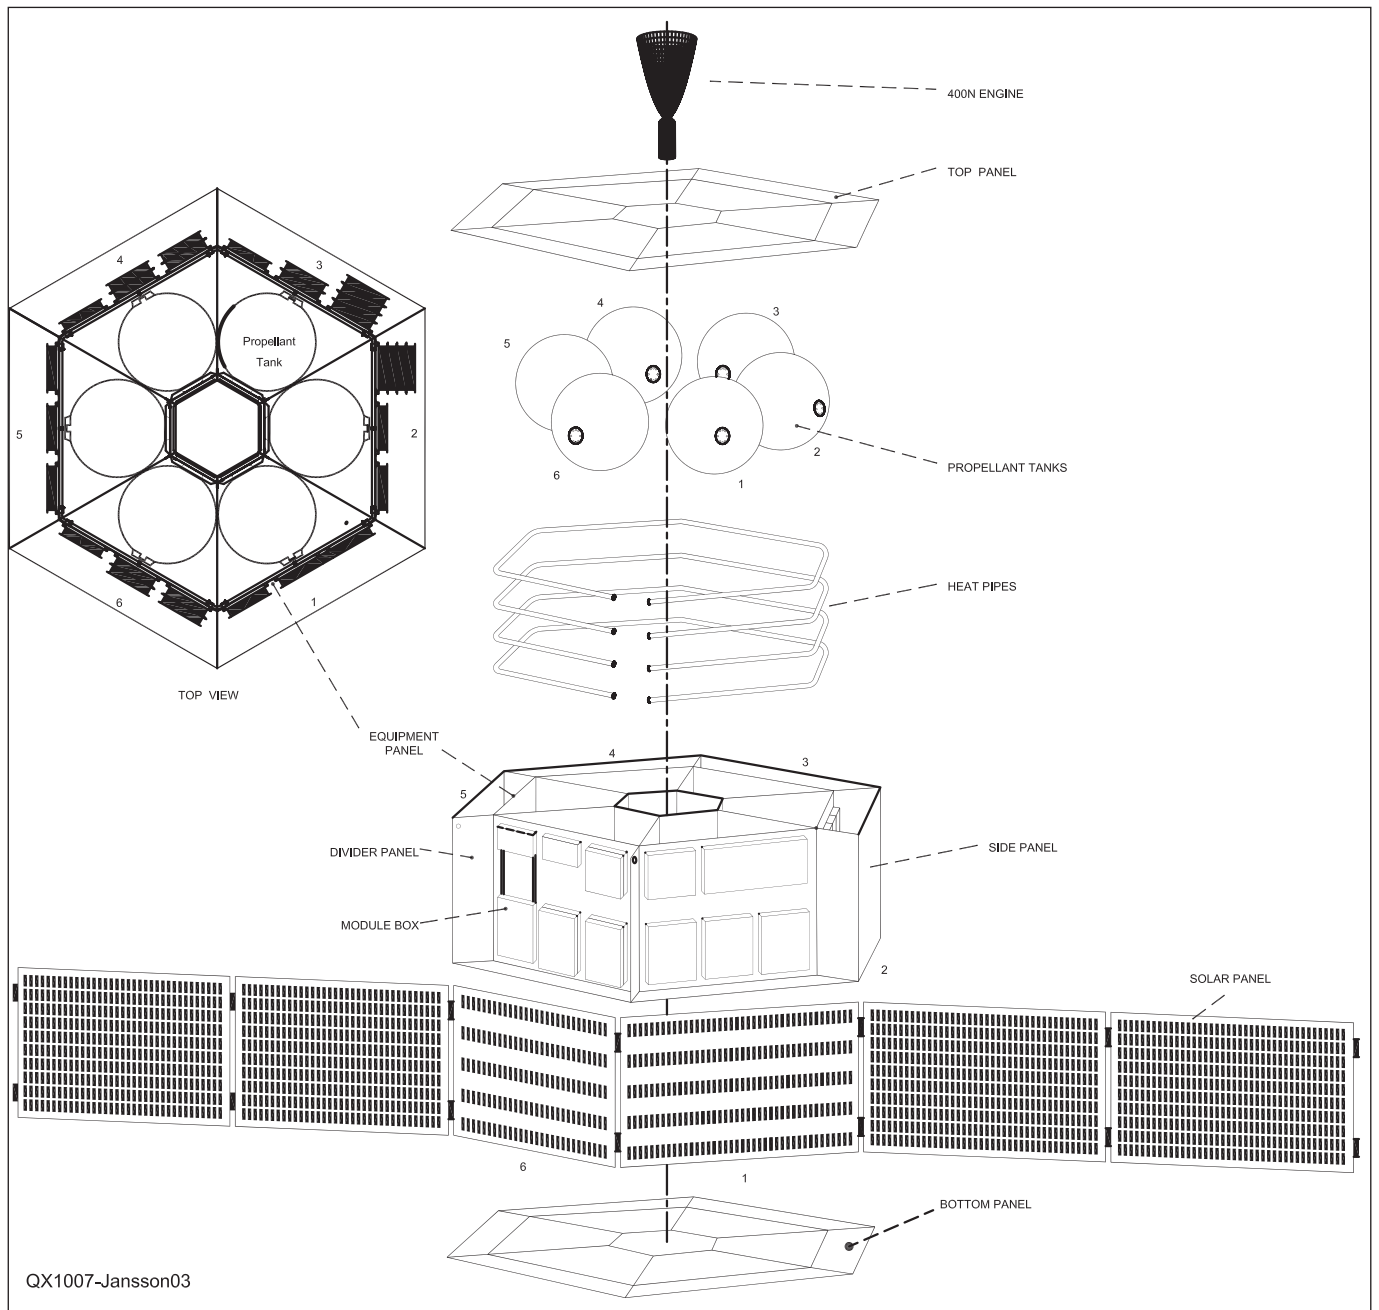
Exploded view of AO-40 spacecraft, showing major components and heat pipes. Wilfred Gladisch, AMSAT-DL, drawing
